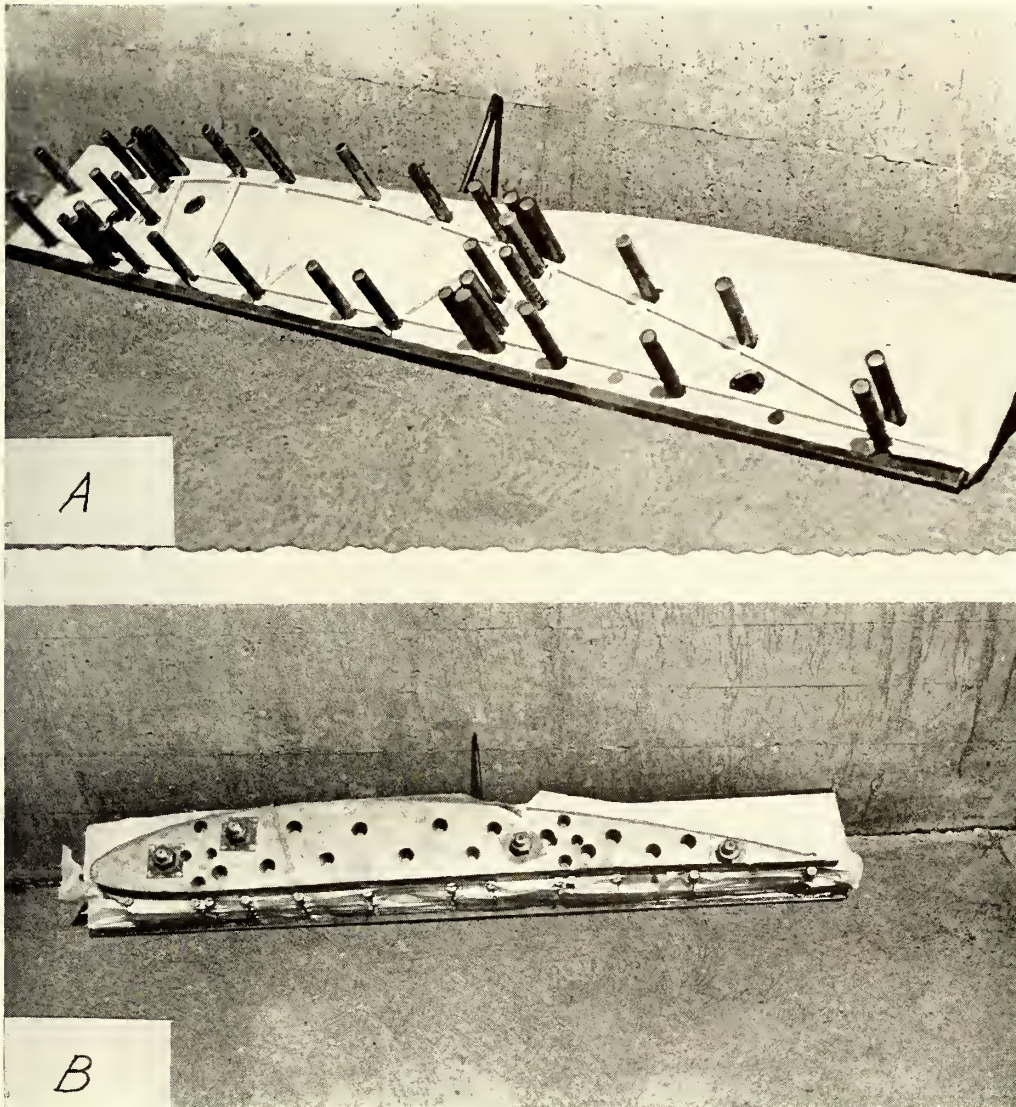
Jig for assembling and pressing several wing ribs in one operation.
